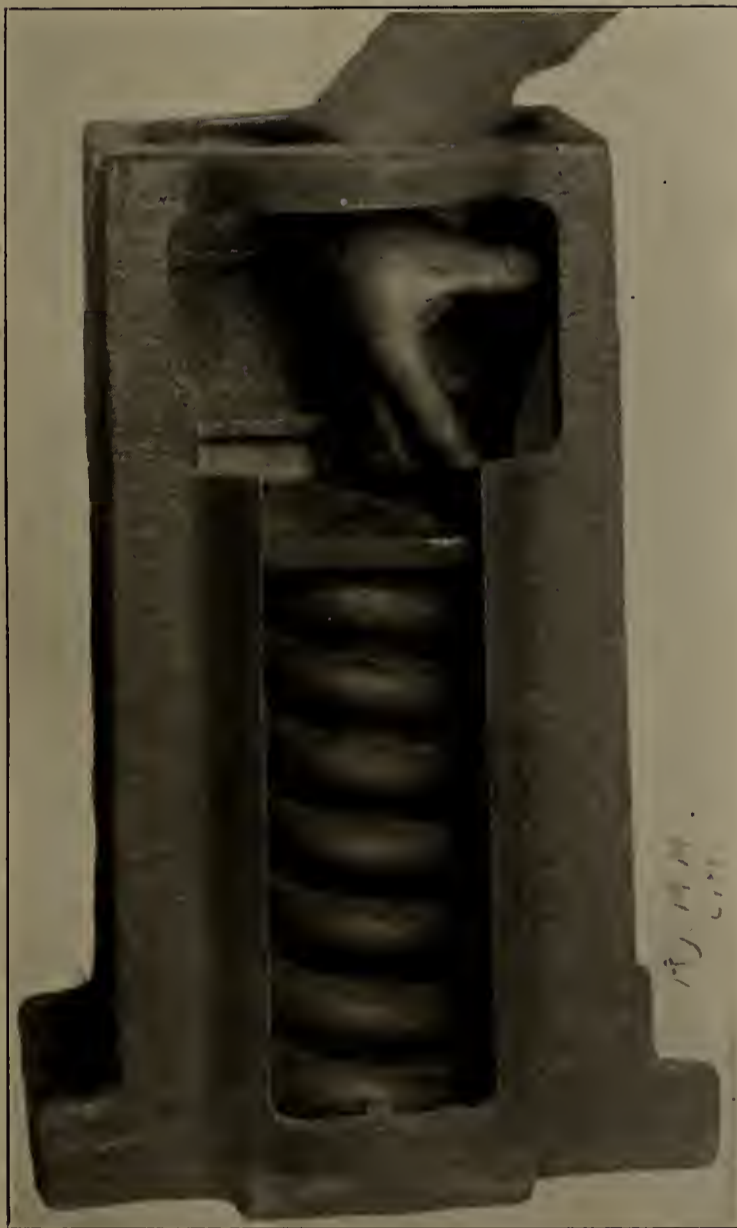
Inserting Wedge Plates on Both Sides of Barrel, Gould Draft Gear.
